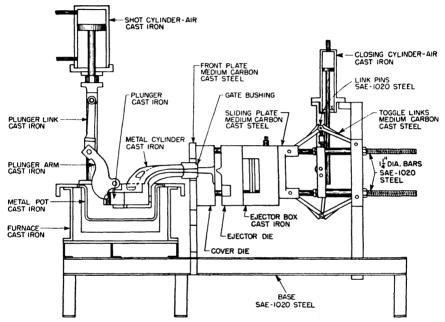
Improved version of the original machine. It utilized pneumatic pressure to force the metal into the die and had the frame and the die in a fixed plane.
